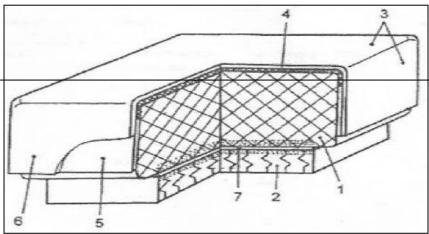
The design of the heat-shielding element: 1- tiles made of fibrous heat-shielding composite material; 2- damping gasket; 3,6 - varnish moisture-proof coating; 4,5 - external and lateral glassy erosion-resistant coating; 7- adhesive layer.
